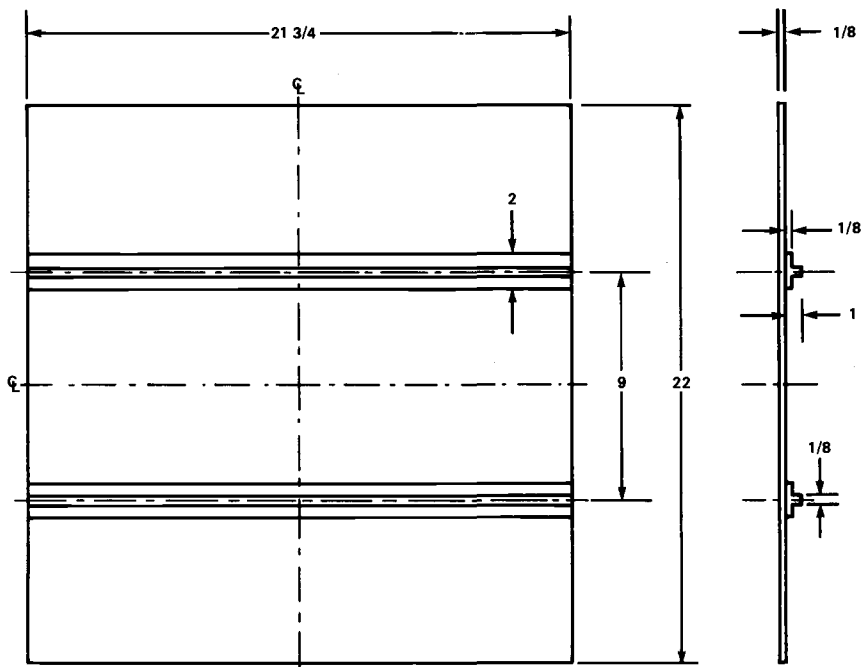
Weldbonded stiffened panel (all dimensions in inches; 1 in. = 25.4 mm).
